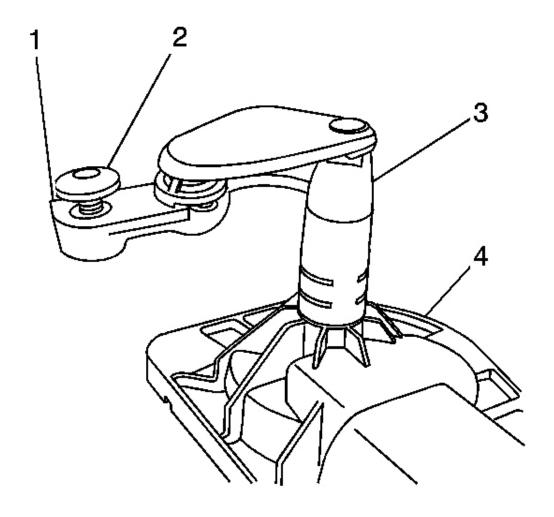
View Of Actuator Arm, Window Hinge Screw & Actuator Retaining Nuts Courtesy of GENERAL MOTORS CORP.
